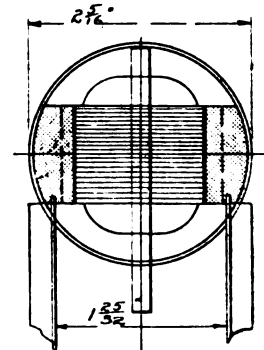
SHOWING THE DISADVANTAGE OF THE "MANCHESTER" BOILER MOTOR WHEN USED IN A LOCOMOTIVE OF THE DIMENSIONS GIVEN IN FIG. 1.
